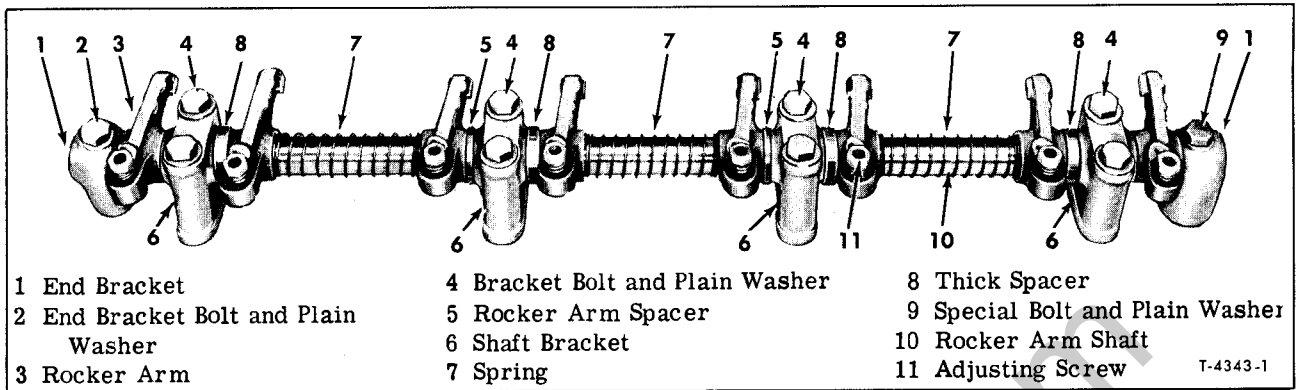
Rocker Arm Shaft and Brackets for V8 Engine
